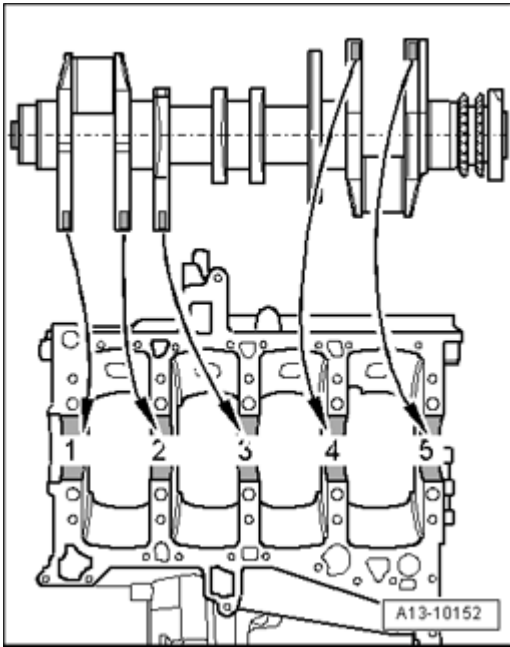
Allocation Of Crankshaft Bearing Shells For Guide Frame - Version I
